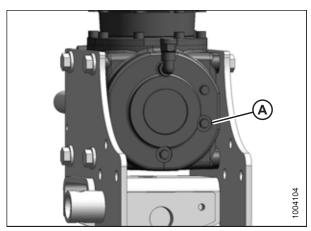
Header Swivel or Hitch Swivel Gearbox Check Plug
